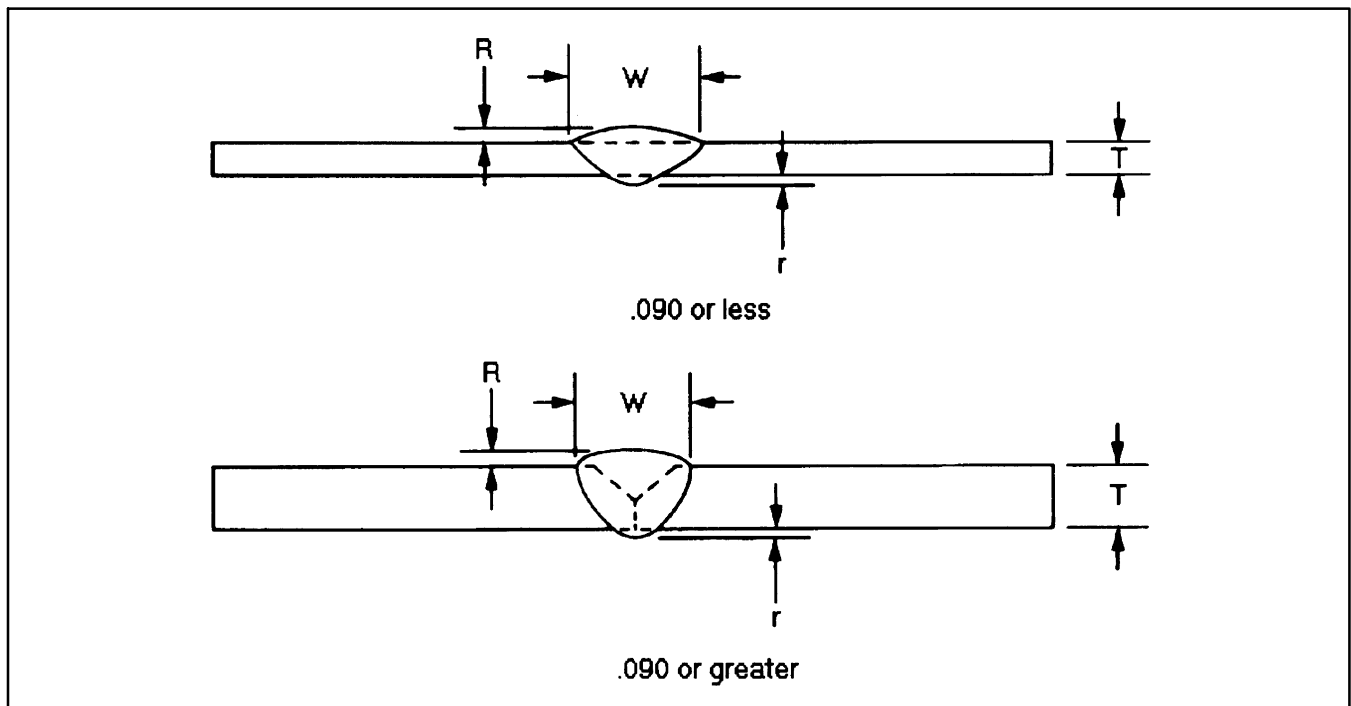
Butt Weld Bead Size, Welded From One Side Only
